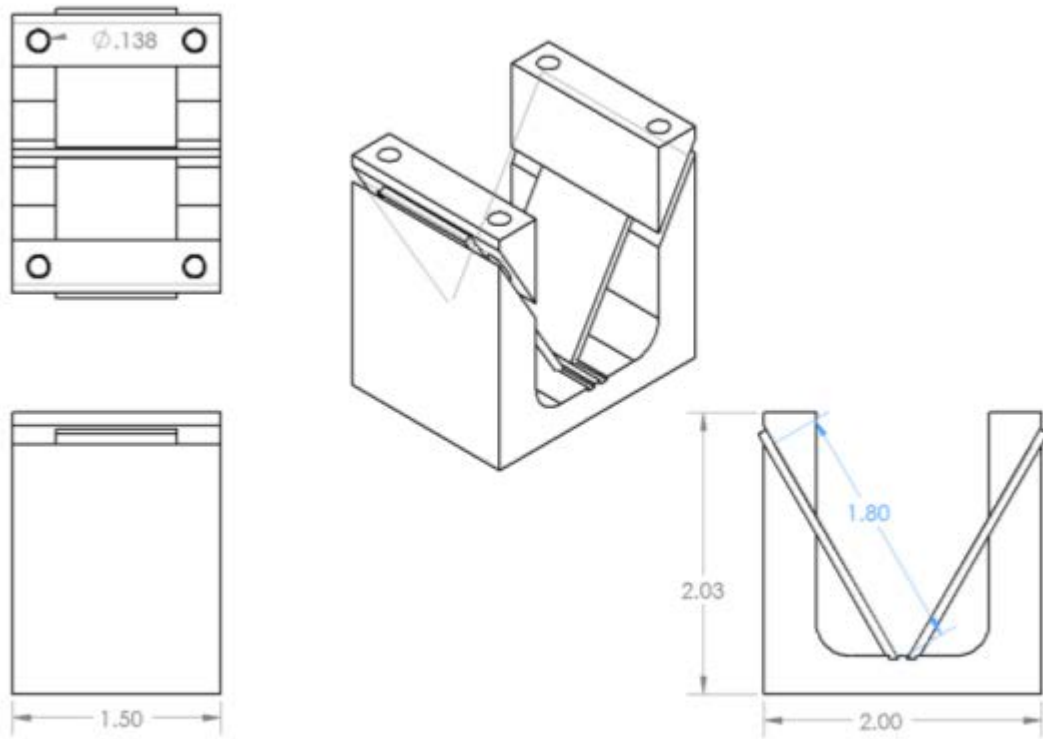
Sensor Assembly Cross-Section Showing Plate Attachment
